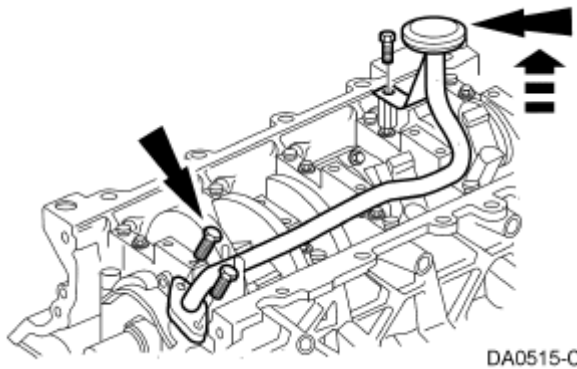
Removing Oil Pump Screen And Pickup Tube
